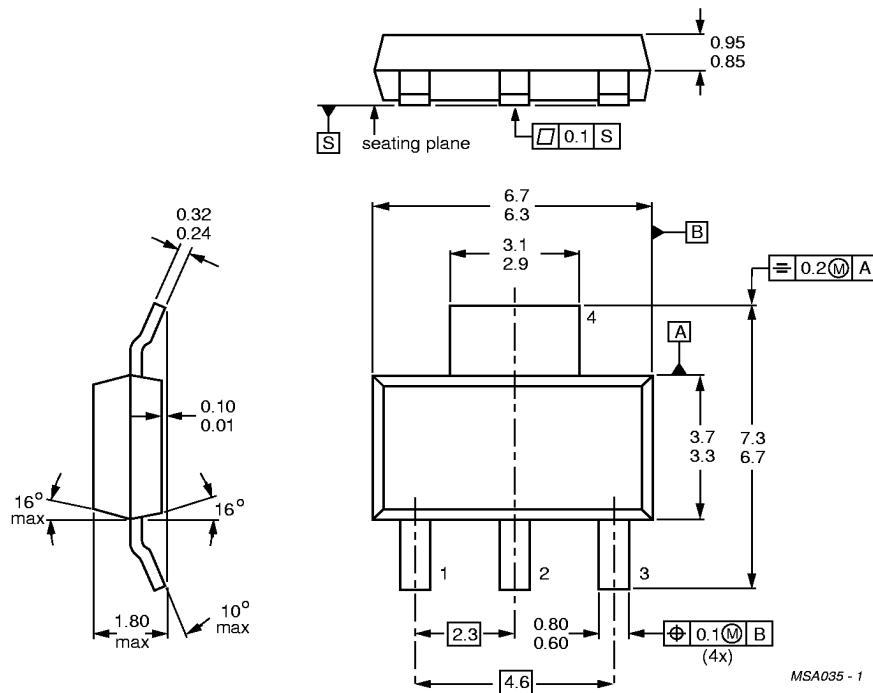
SOT223 surface mounting package<sup>1</sup>.
